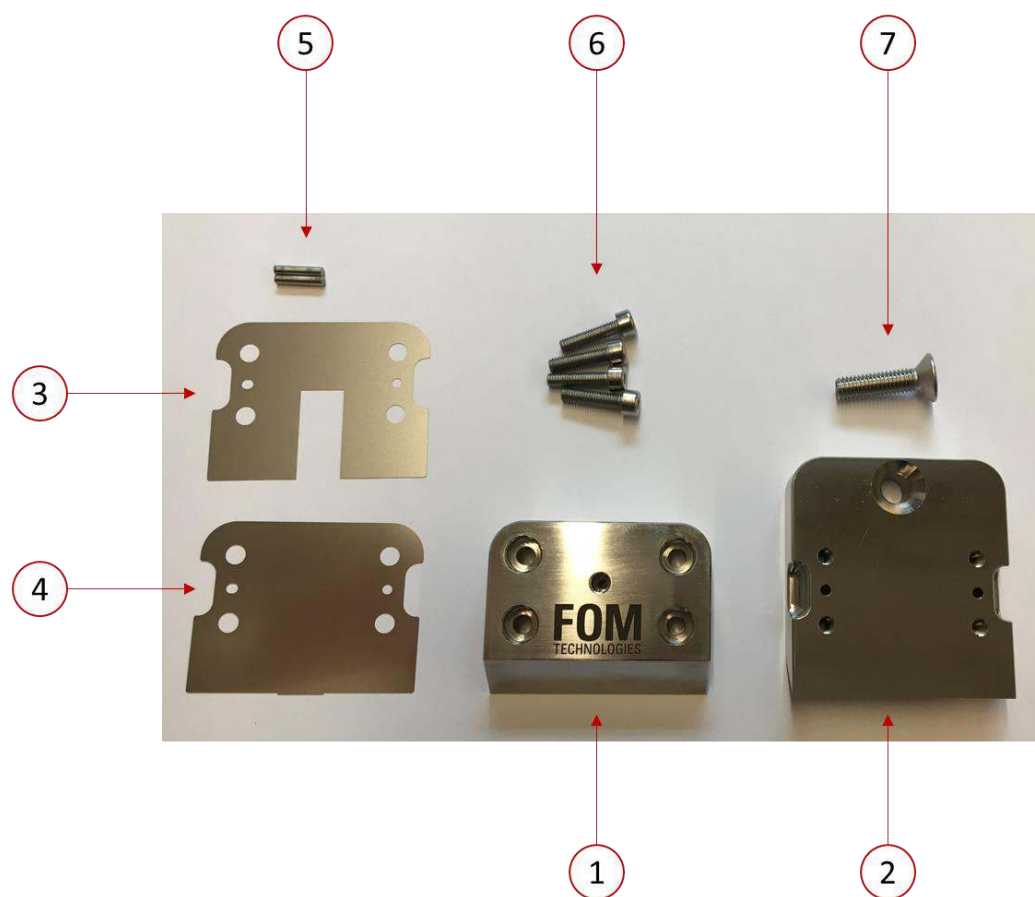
All components of a standard FOM Technologies slot die head before assembly. 1 = Front plate, 2 = Back plate, 3 = shim, 4 = Meniscus guide, 5 = Alignment pins, 6 = Securing bolts, 7 = Mounting bolt.
